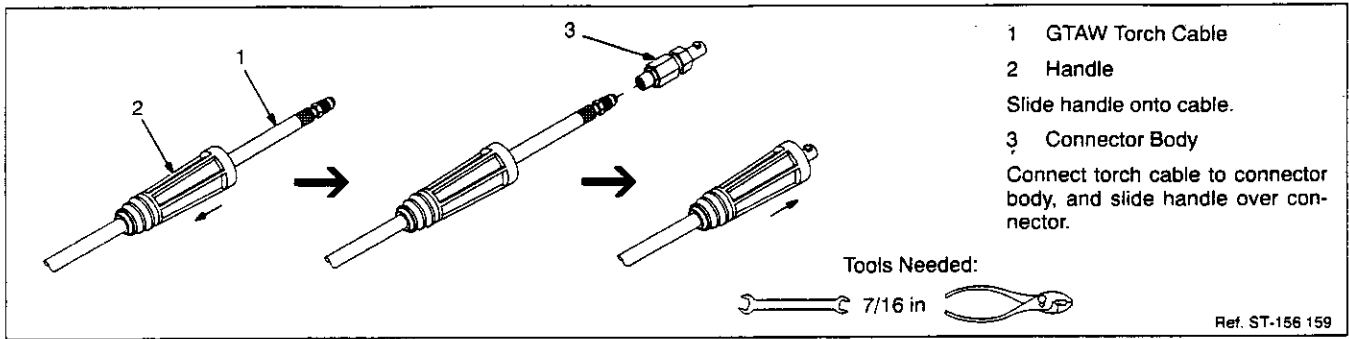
GTAW Torch Electrode/Gas Connector Assembly
